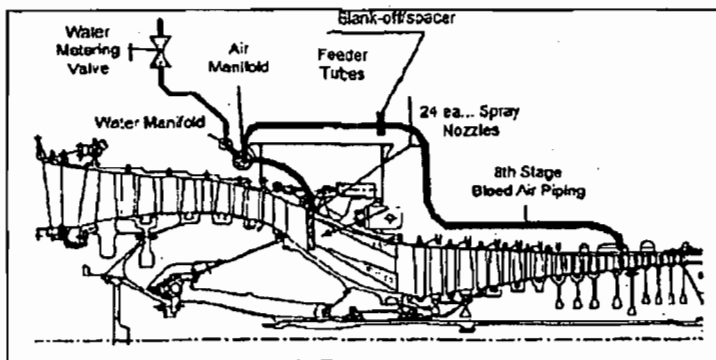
Half Section View of LM6000 Gas Turbine Compressor Section³
